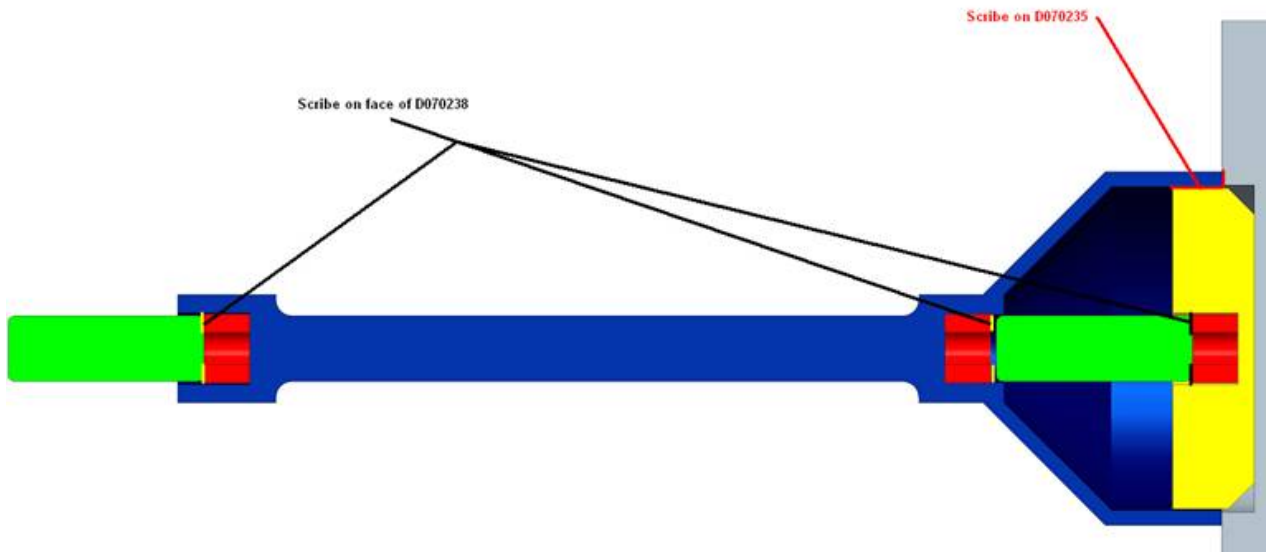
Penultimate Mass Magnet & Flag Holder Assembly (D080580)
